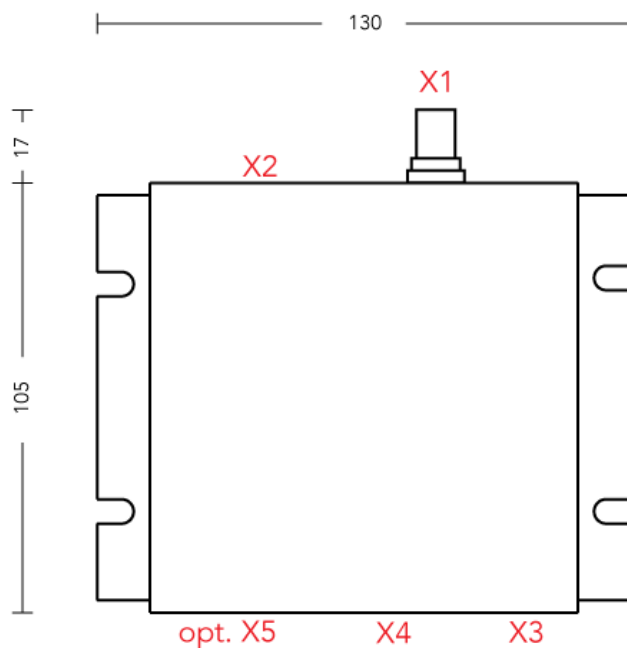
Dimensions of QuasarMX RFID Reader (in mm)
